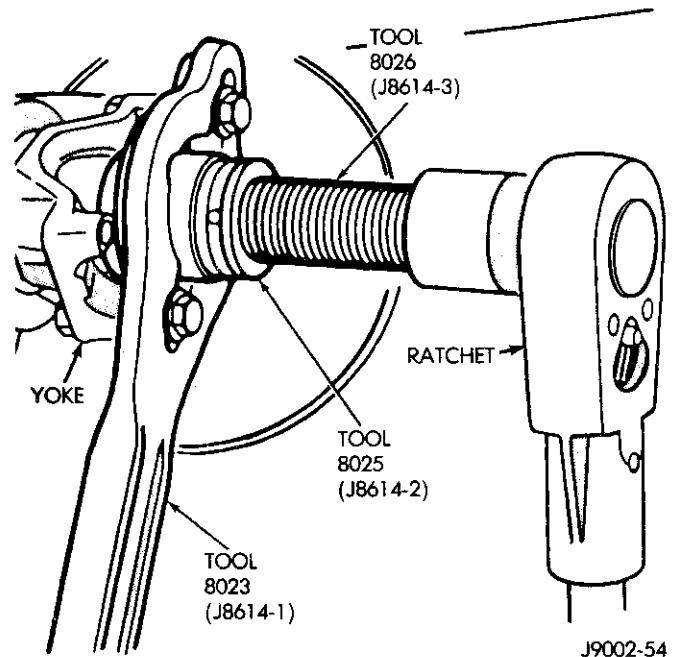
Pinion Gear Shaft (Axle) Yoke Removal
